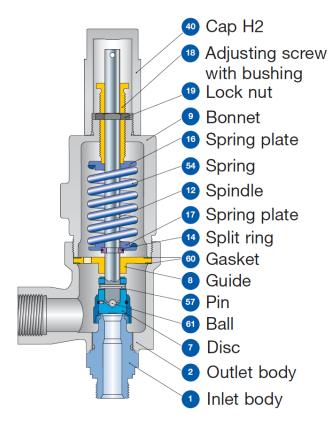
Parts of a conventional spring loaded safety valve - threaded
